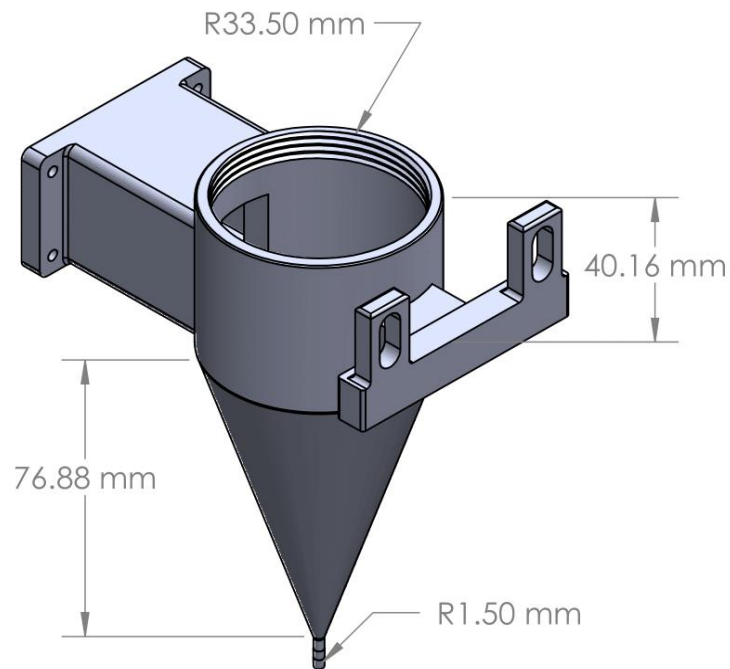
Cyclone main body dimensions: a) height $h = 76.88$ mm b) radius $r = 33.5$ mm.
